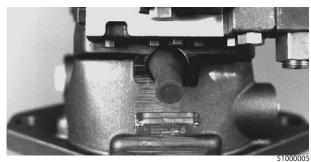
Minimum Displacement Limiter with Tamper Resistant Cap (Cartridge Motor Configuration Shown)
